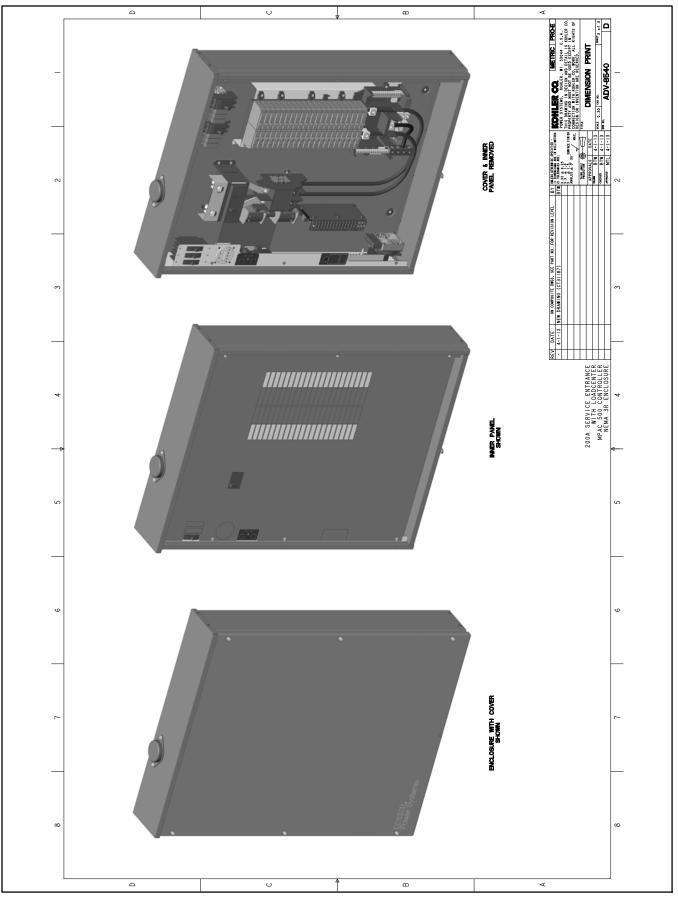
Dimension Drawing, 200 Amp Service Entrance Model with Load Center, ADV-8540, Sheet 3 of 3
